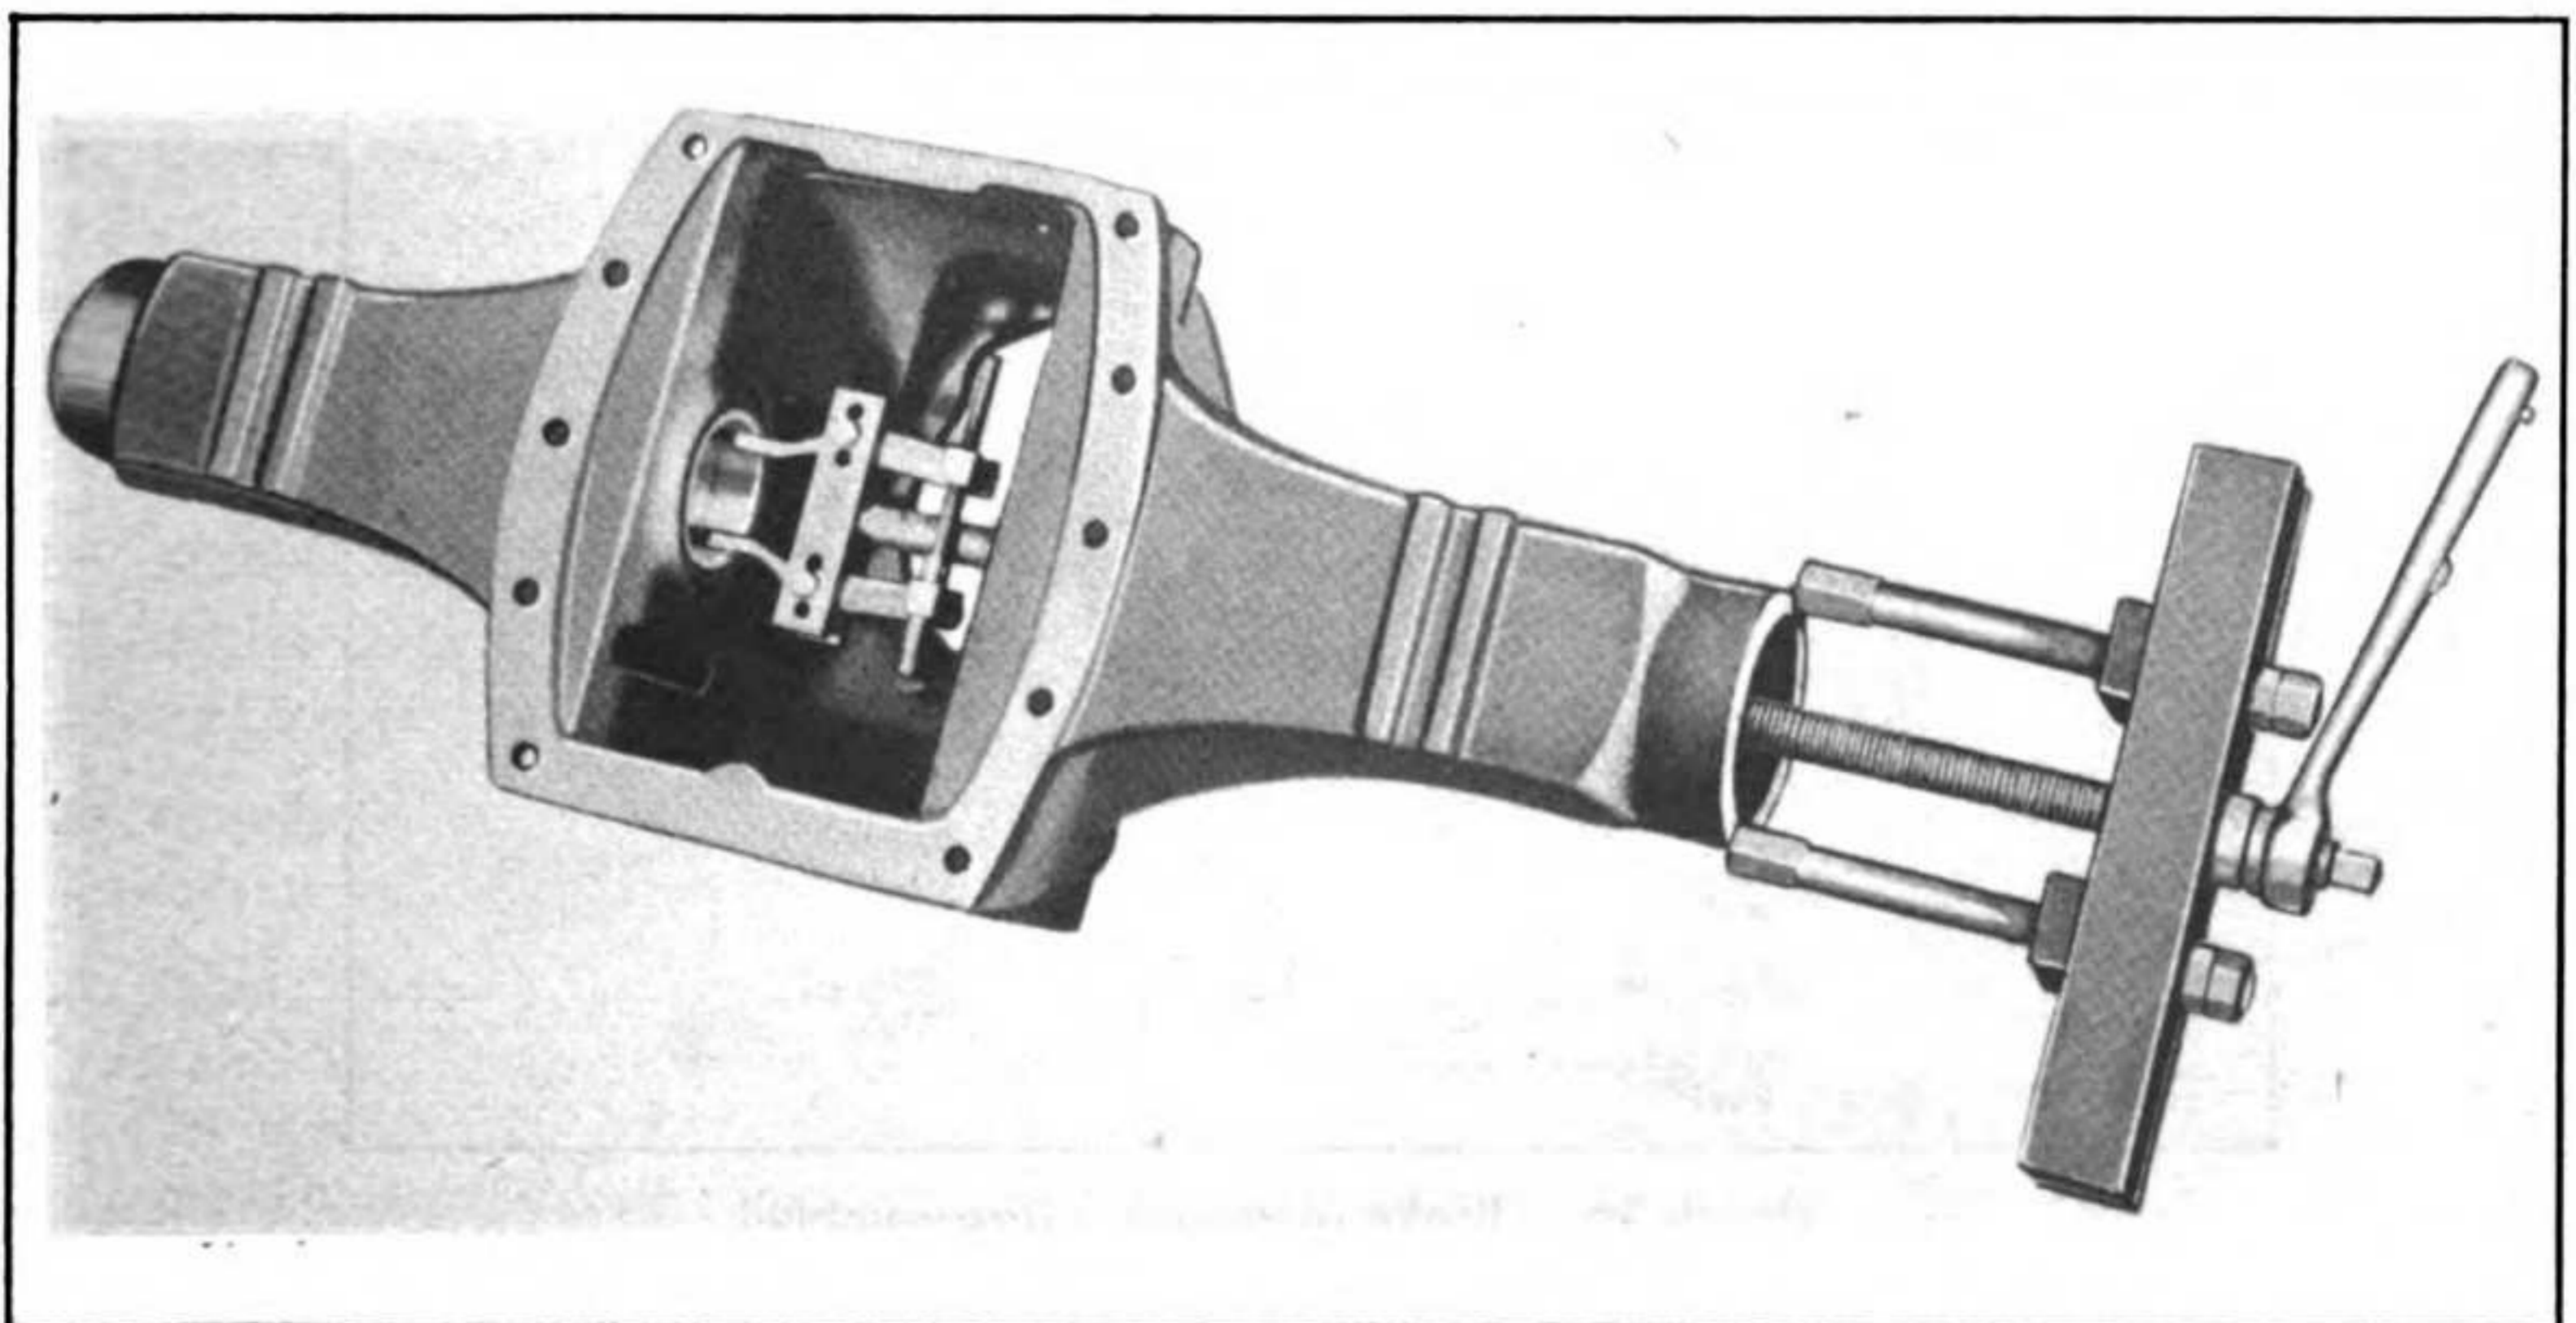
Removing Inner Bearing Races from Rear Axle Housing
